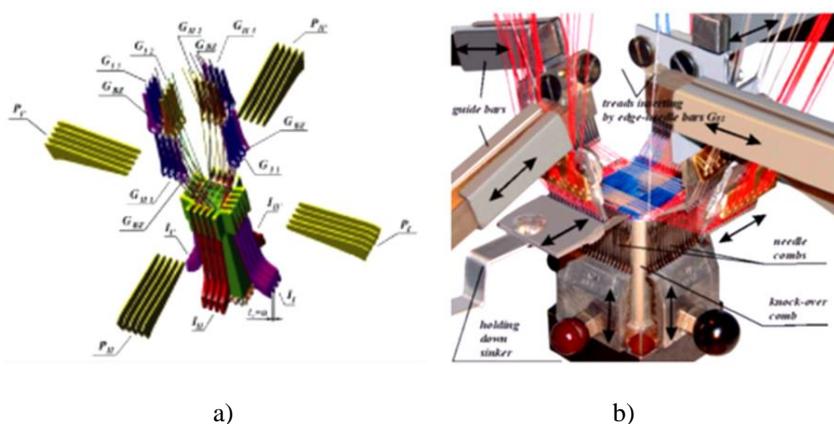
Concept of a four-comb warp-knitting machine for the formation of spatial knitted products: a) a schematic drawing of the structure and component elements of the machine, b) a photograph of a working model
